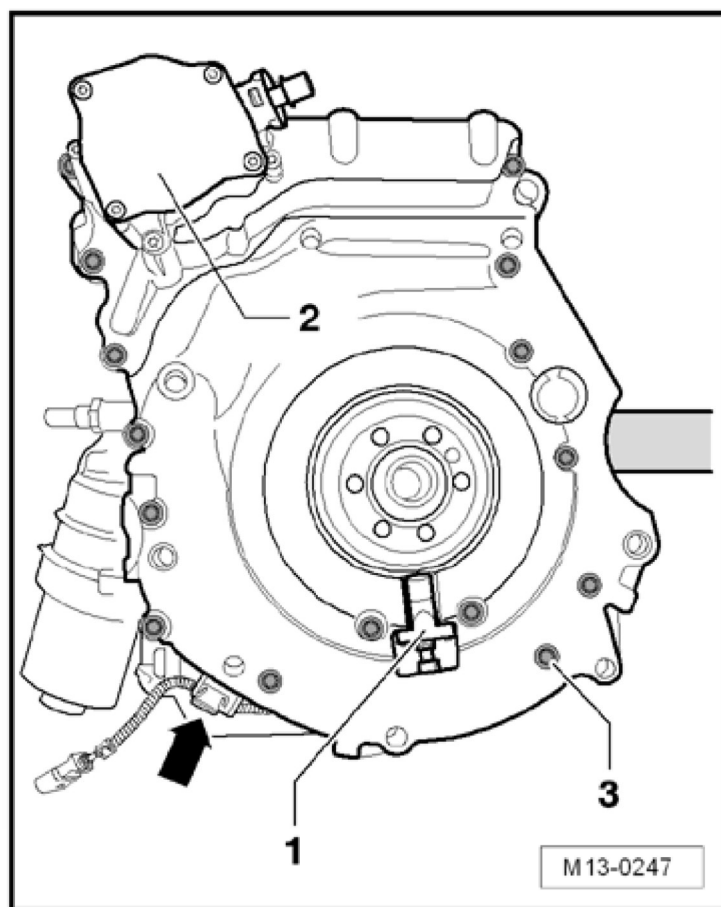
Engine Speed Sensor, Vacuum Pump And Bolt
